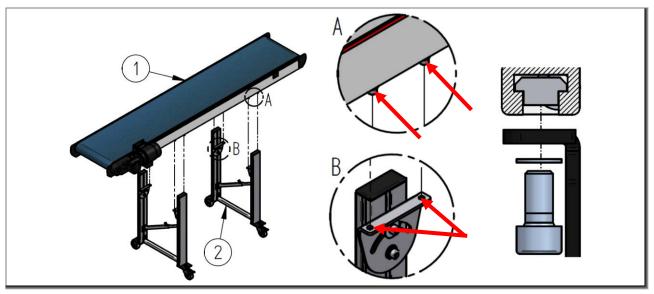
Assembly, conveyor with support HE 030 - HM 260 (typical)
